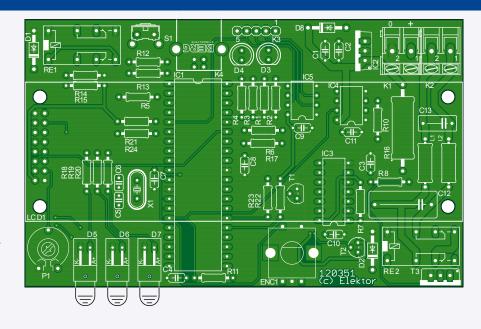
The dimensions of the PCB are such that the display can be mounted above it using four stand-offs.
